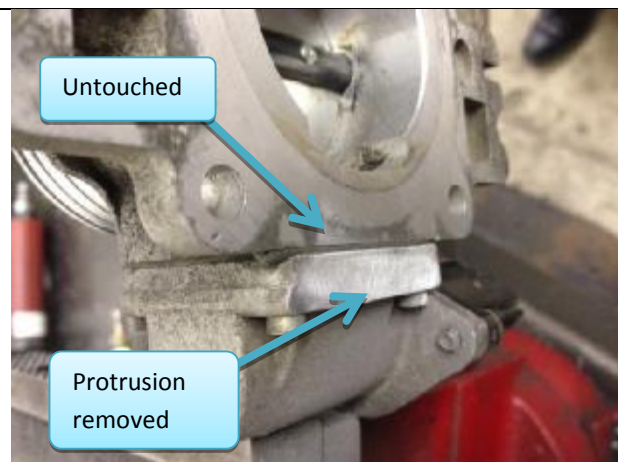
IAC protrusion removed without disturbing bottom of throttle body.
